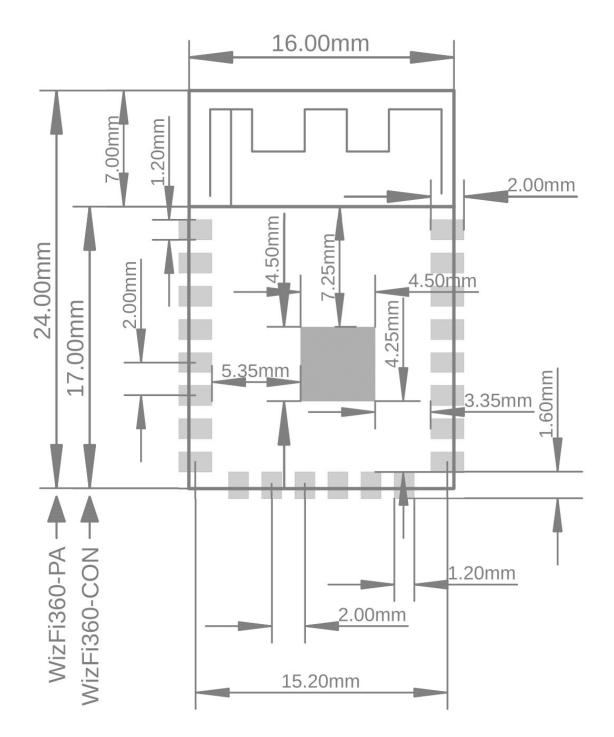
Recommended PCB Land Pattern of WizFi360-PA
